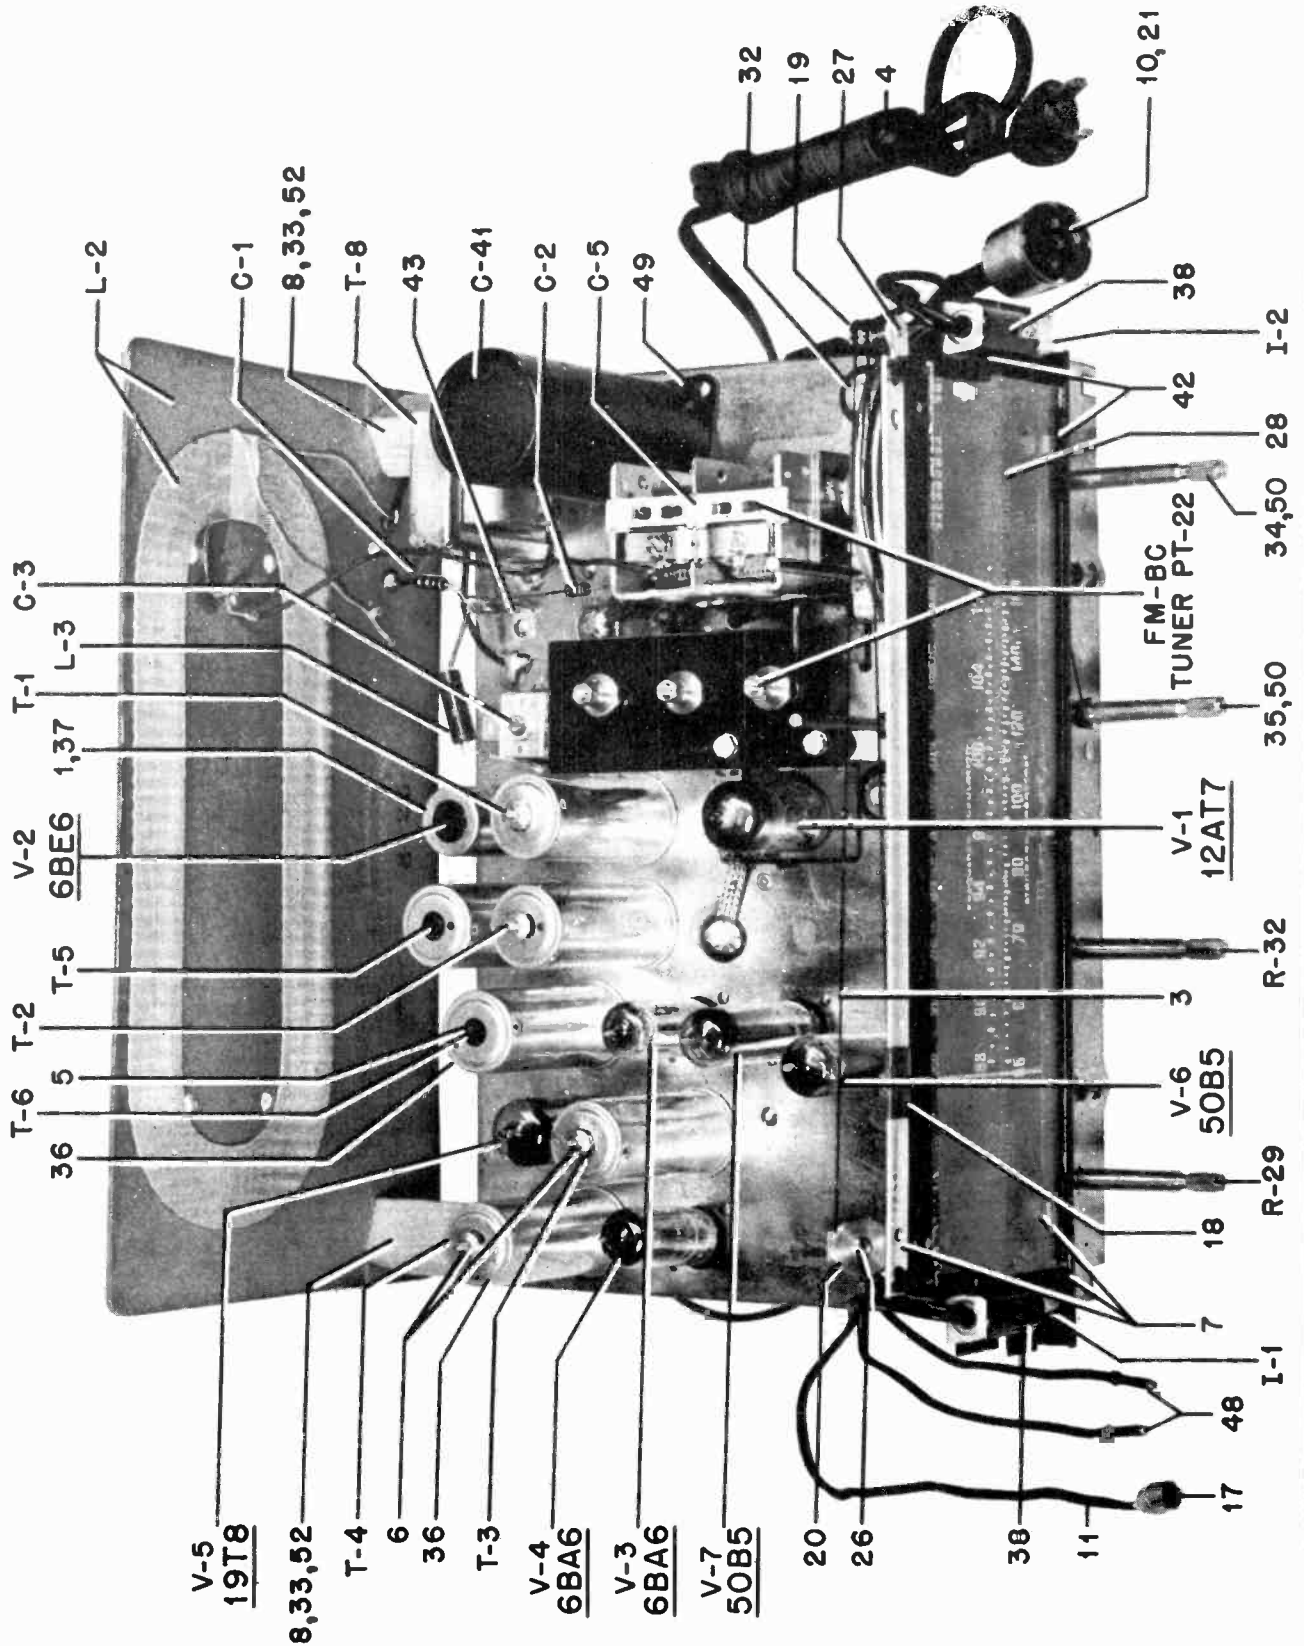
CHASSIS HS-133 PARTS LOCATIONS - TOP VIEW
